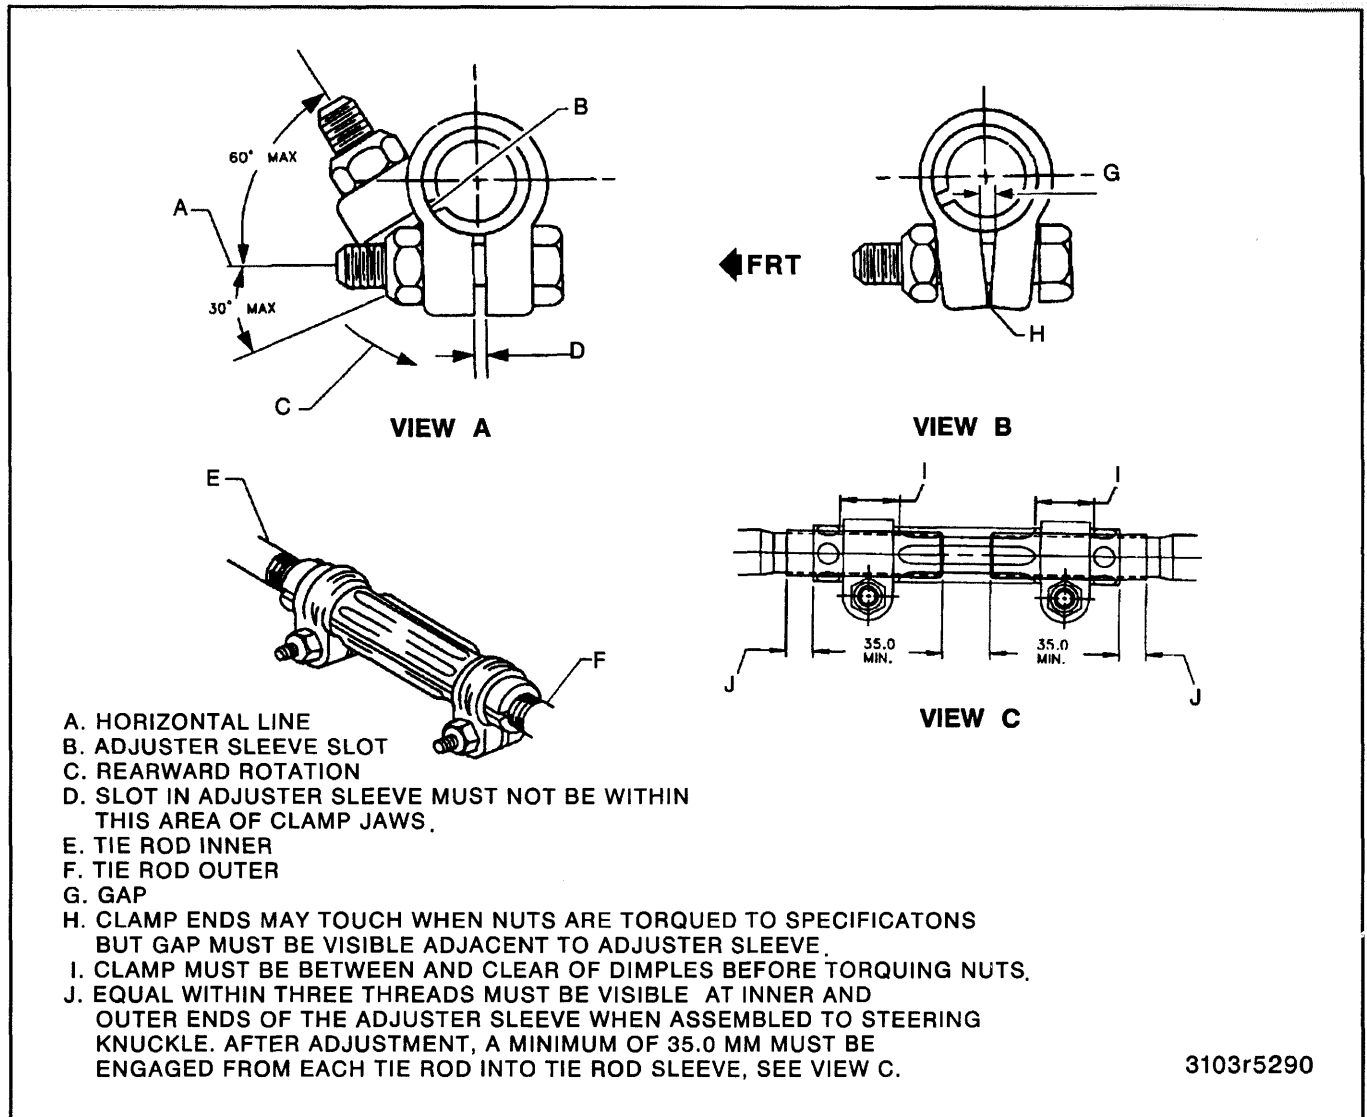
Tie Rod Clamp and Adjuster Tube Positioning
